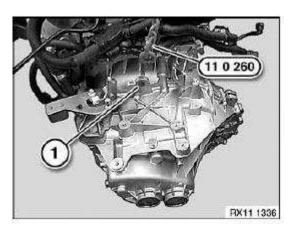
Identifying Special Tool (11 0 260) On Transmission
